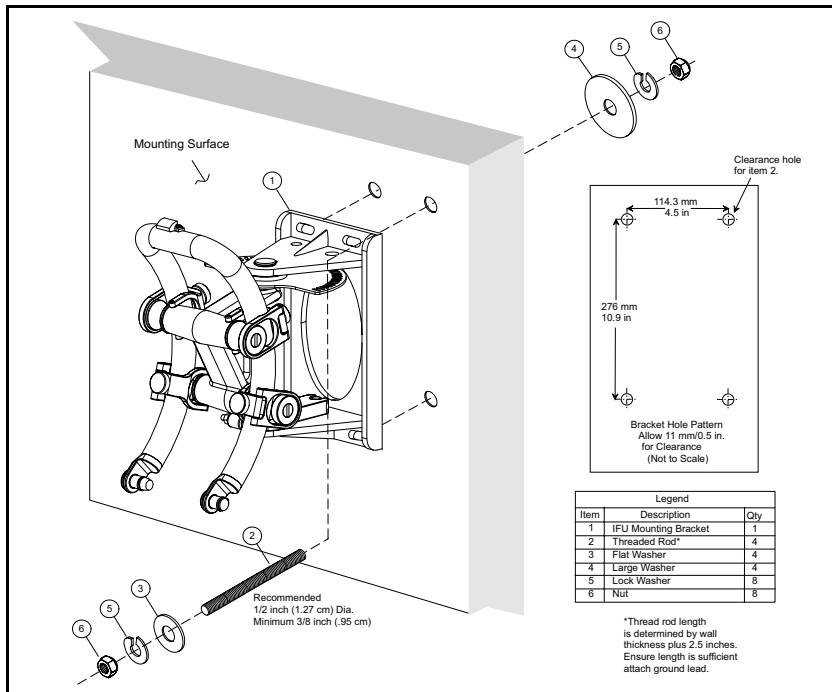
Attaching an IFU Bracket to a Wall (Typical)
